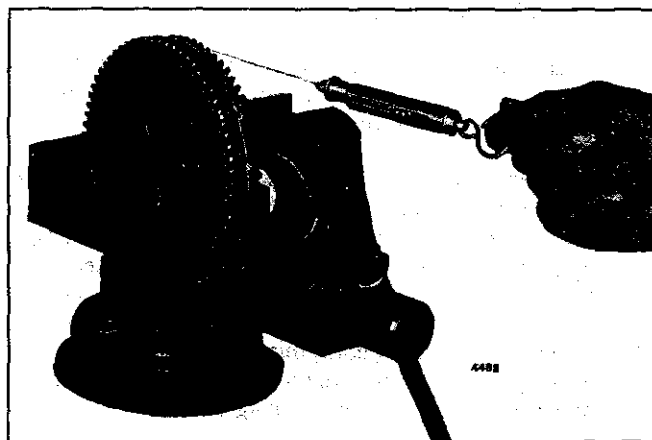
Checking Pre-Load of Idler Gear Bearing
